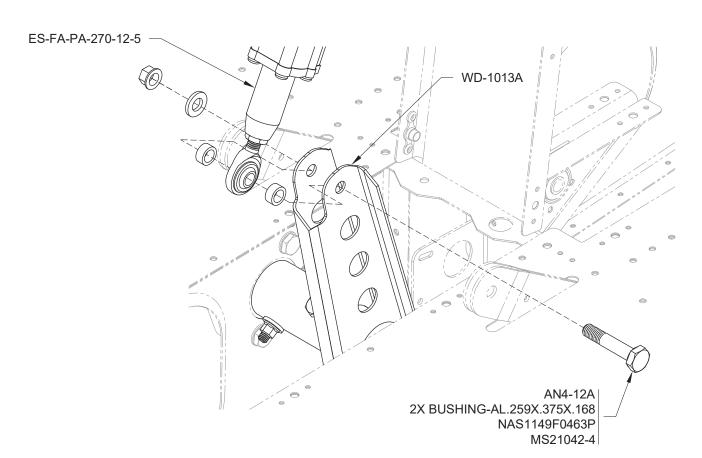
LOWER FLAP MOTOR ATTACHMENT
